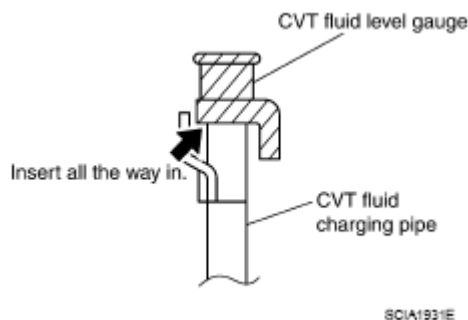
Identifying CVT Fluid Charging Pipe
